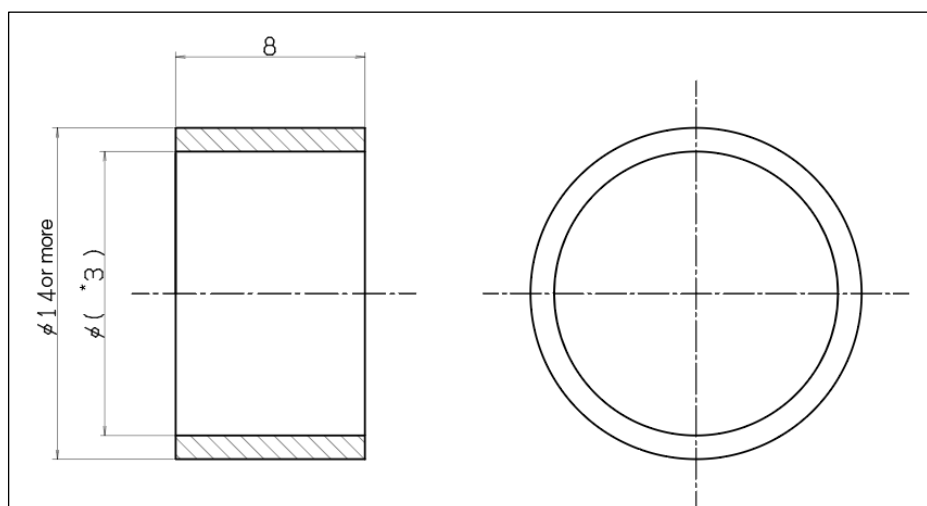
Design 2-1 of One-Way Clutch Fitting Section for Metal Housing
